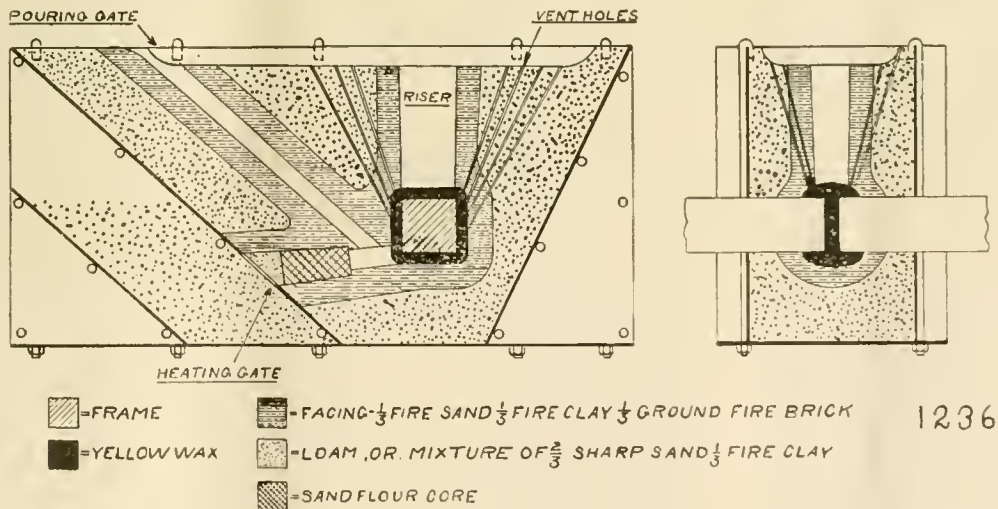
METHOD TO BE EMPLOYED IN CONSTRUCTING MOLDS FOR MAKING THERMITE WELDS AND MATERIALS NEEDED.
